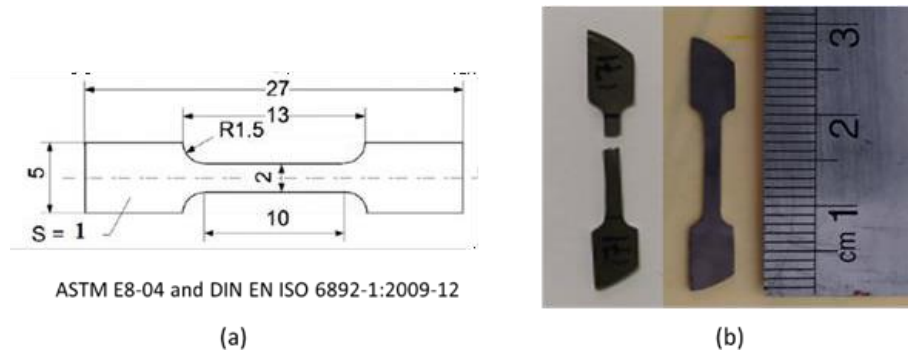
Specimen Size for Tensile Test; a) Standard; b) Actual Sample
